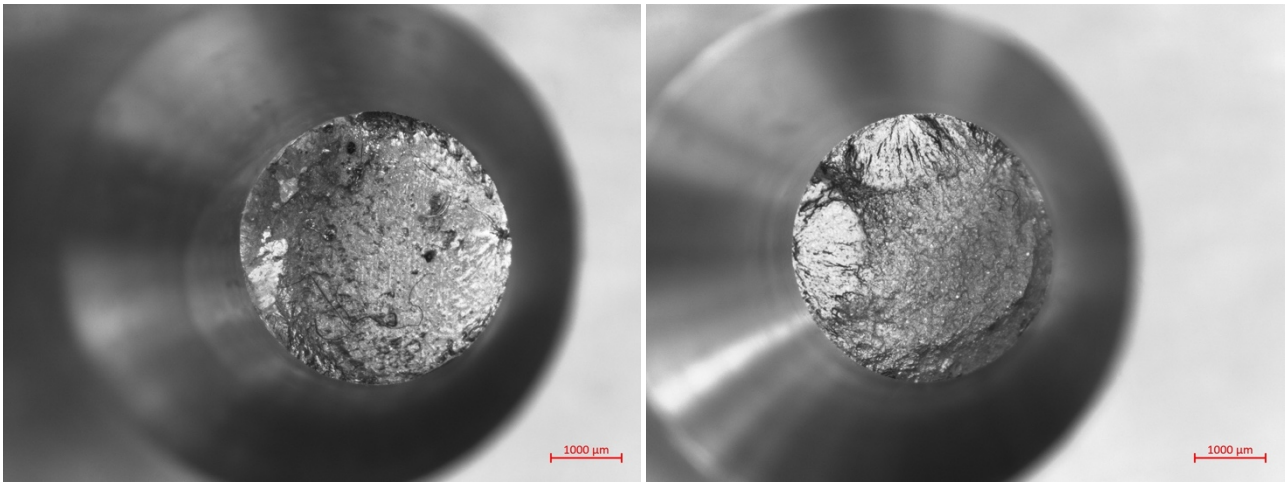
Fracture surfaces of coupons 11 (left) and 14 (right)
